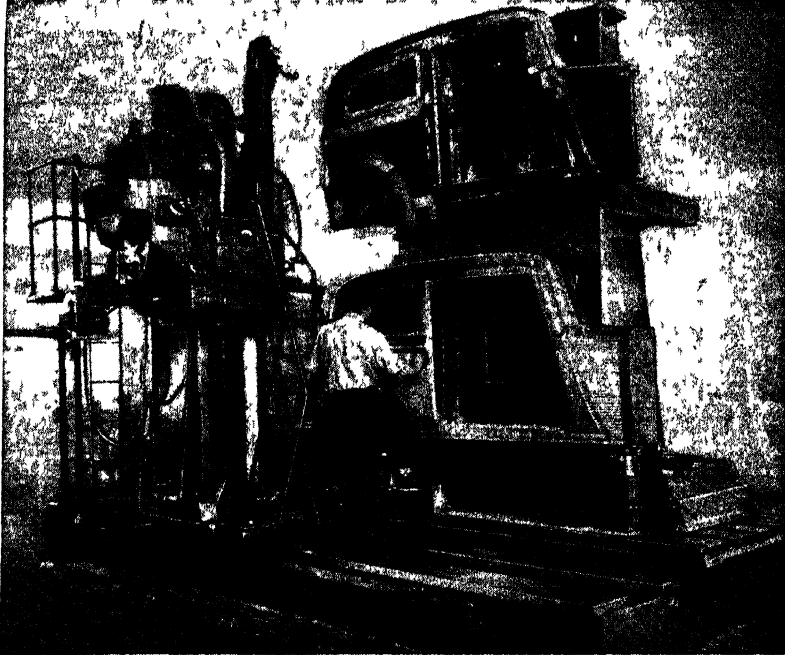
Big punch for sedan side cut on Keller (Pratt & Whitney) automatic tool room machine.
